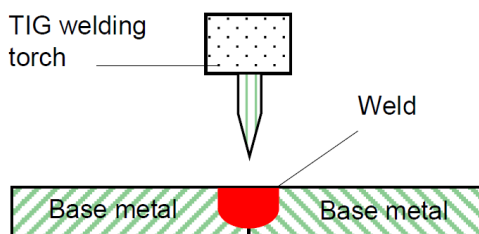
Illustration of relative positions between the TIG welding torch and the base metals, as well as the configuration of the welding joint
